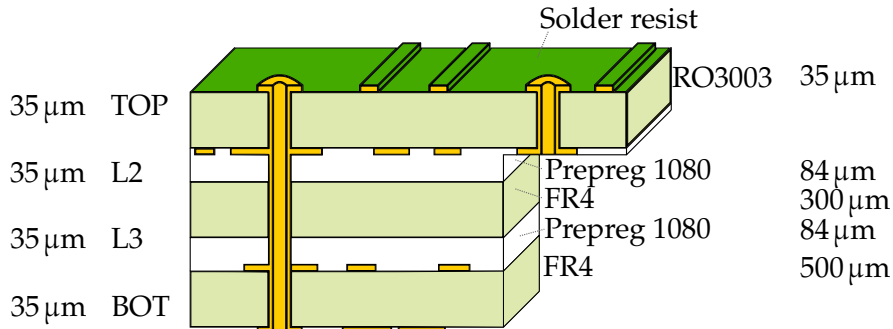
Layer stack of the frontend PCB with dimensions.
